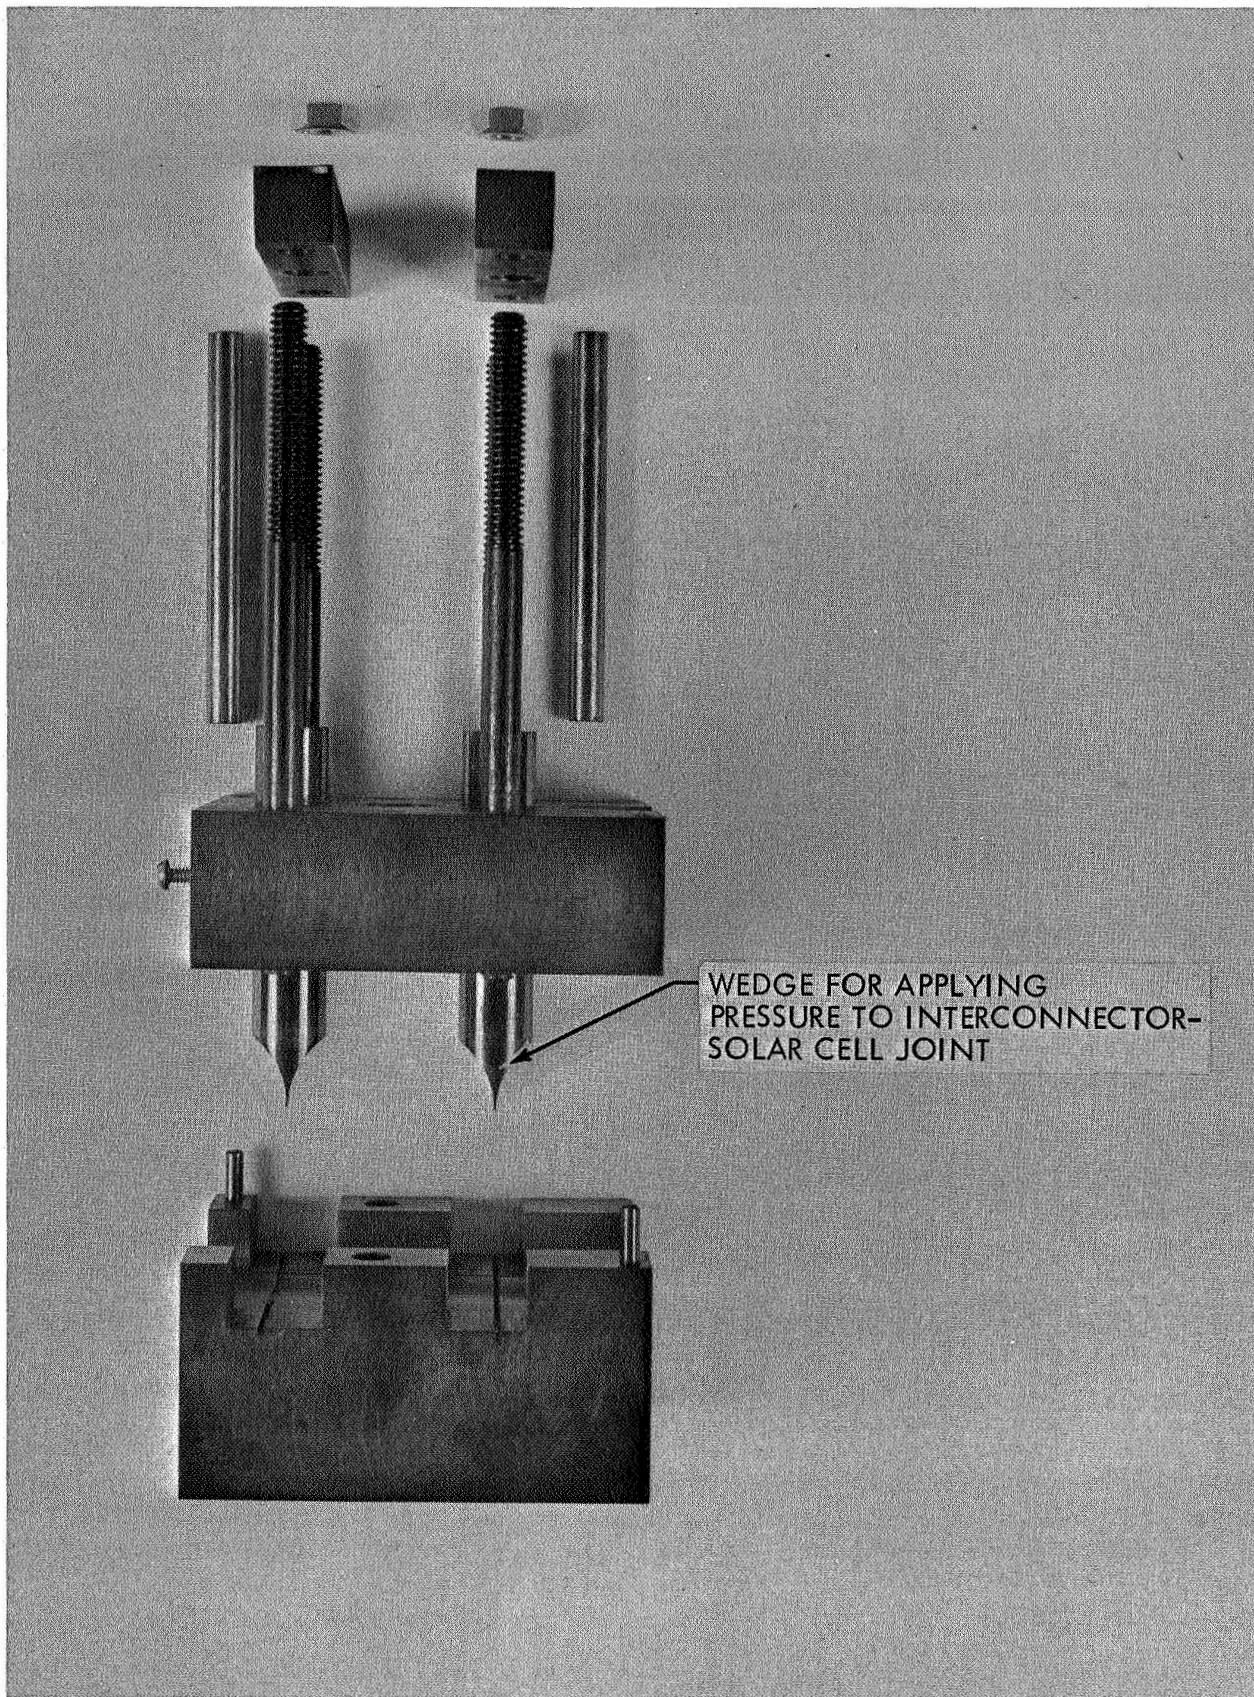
EXPLODED VIEW OF THERMAL DIFFUSION BONDING TOOL
